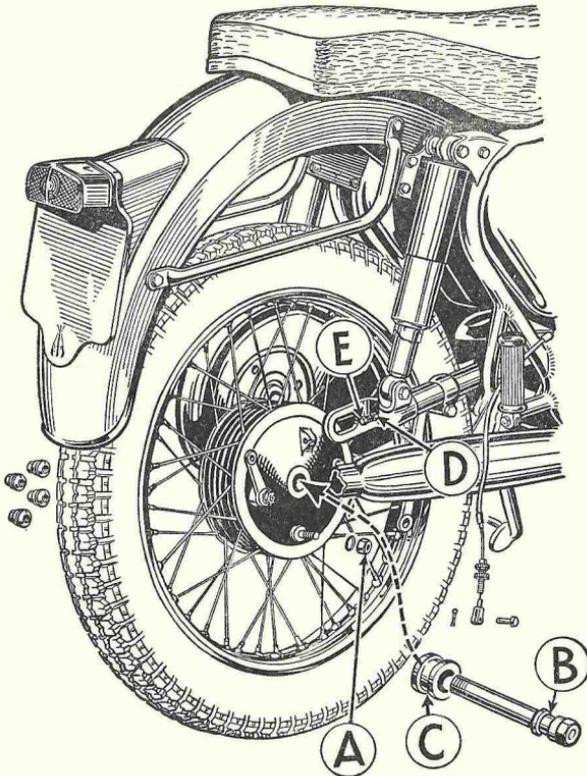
Rear Wheel Removal and Rear Chain Adjustment
